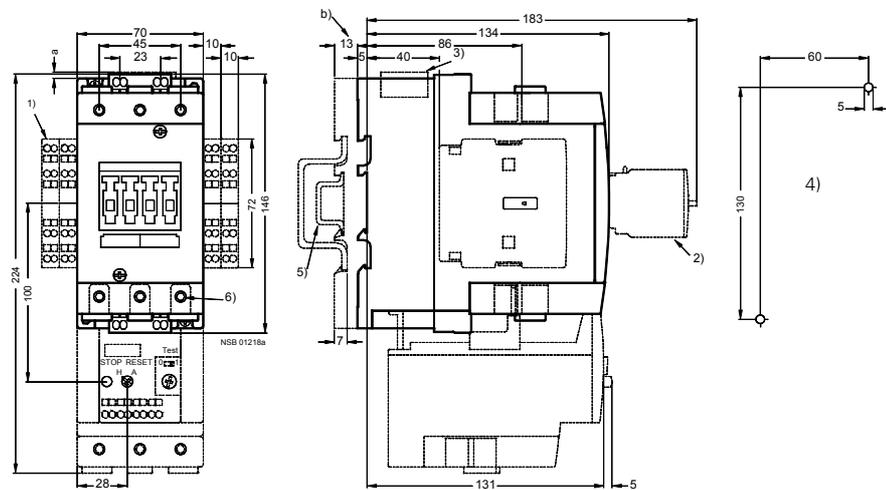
3RT10 4 contactors (Cage Clamp-connection) with surge suppressor, auxiliary contact blocks and installed overload relay
